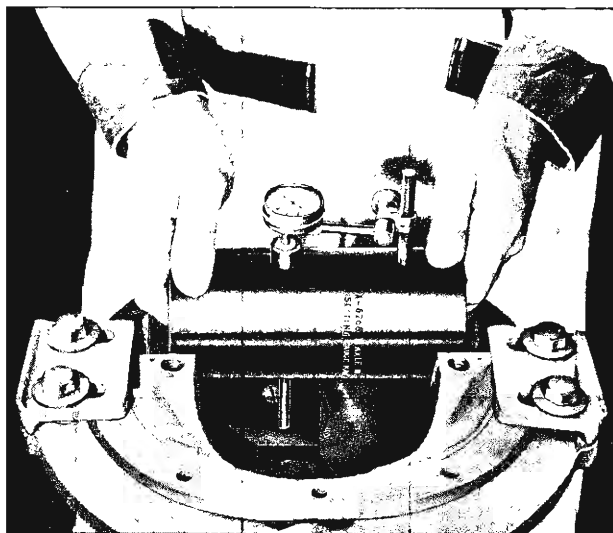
Checking Pinion Setting Gauge Dial Reading
